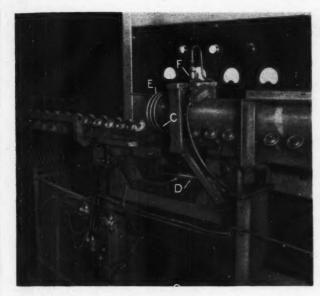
In this close-up view of the Delapena induction heating machine employed for annealing the tubes may be seen the inductor-coil, stop, and conveyor. The cycle is automatically linked to that of the swaging machine
